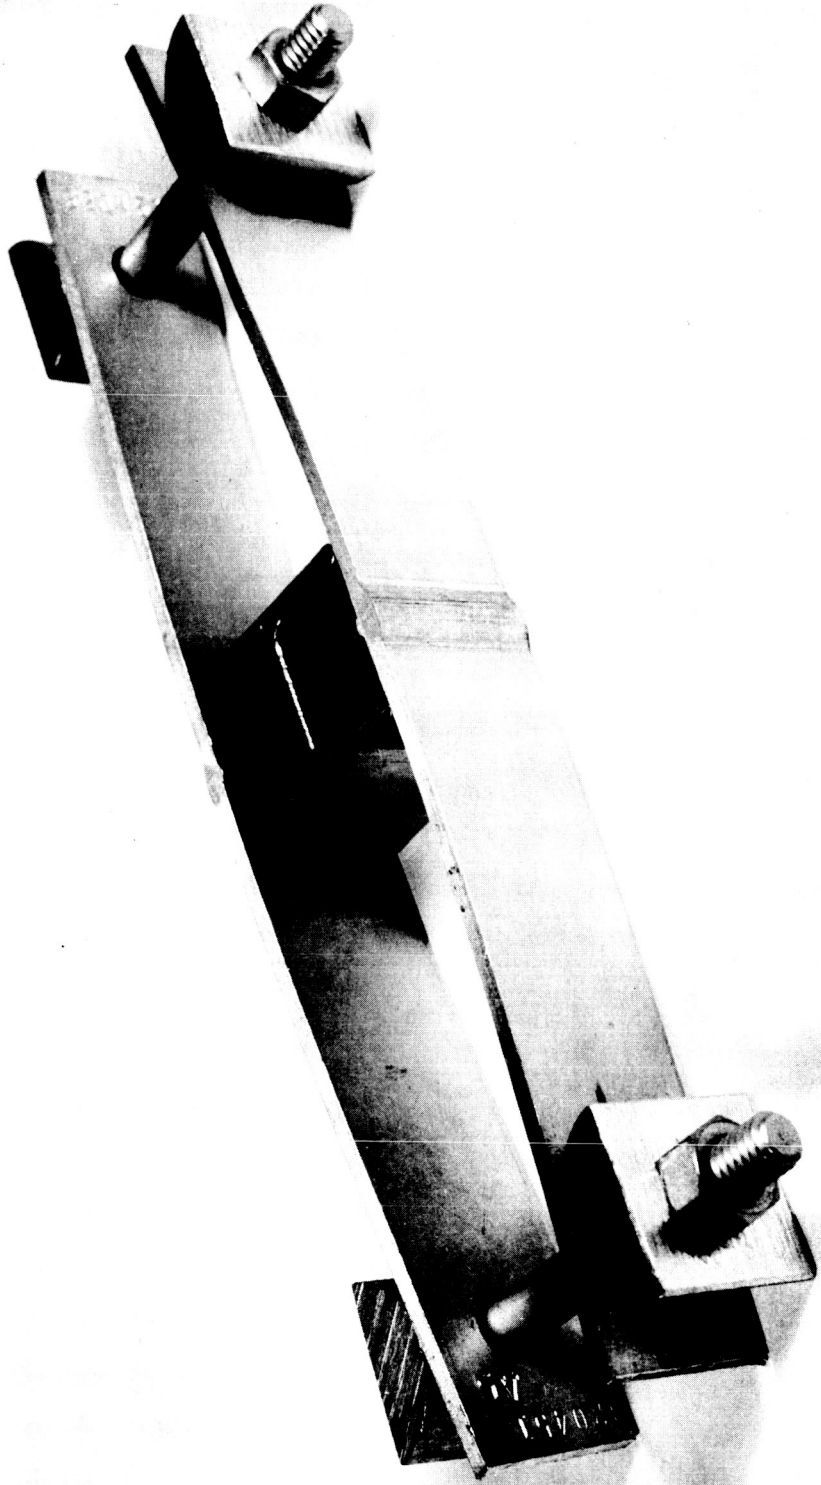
Beam stress corrosion assembly used to stress 0.125" thick welded specimens in bending by constant deformation
